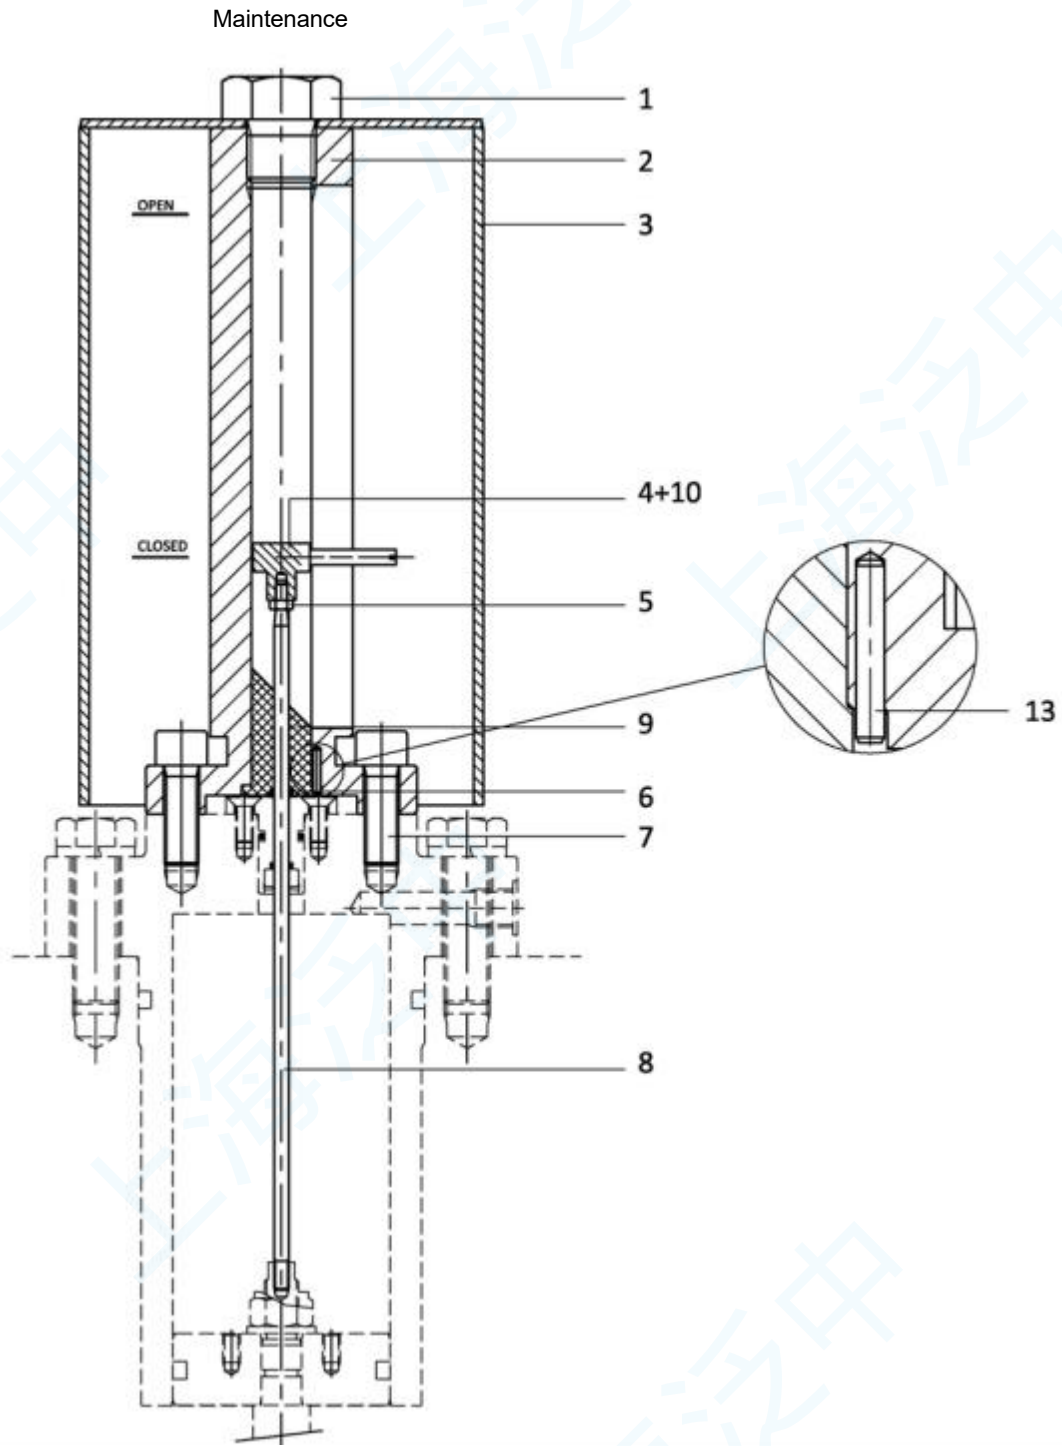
Cross Section of position indicator for R100S(M)
